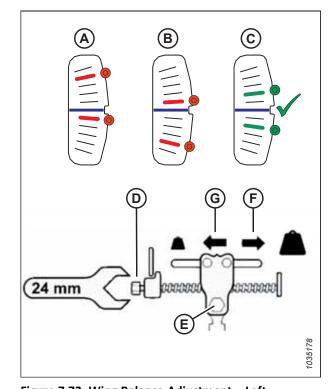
Wing Balance Adjustment – Left Side Shown
